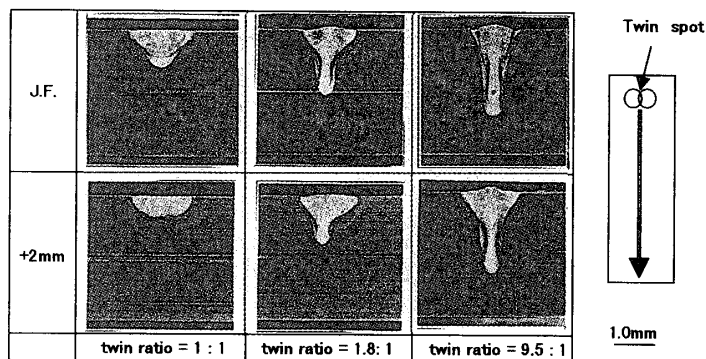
Cross section of laser welded bead by twin spot system.
